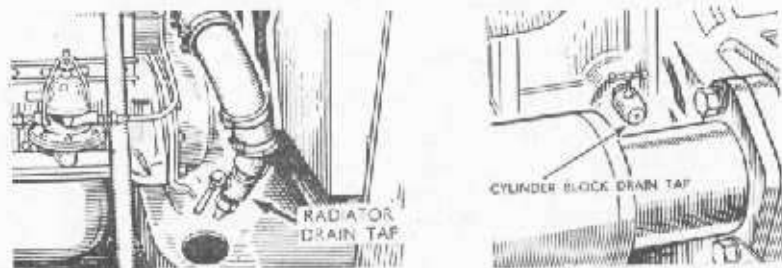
Cooling system drain taps. The cylinder block drain tap is at the rear end of the engine on the left-hand side, and is accessible through an inspection door inside the cab.
